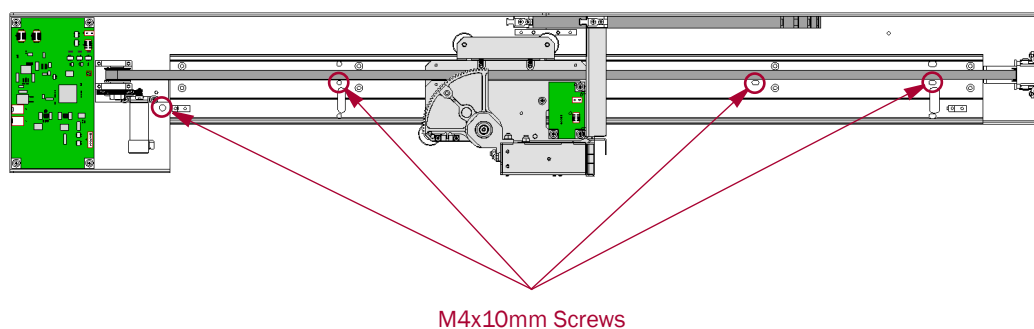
Screw Locations to Attach the HRA to the Brackets
